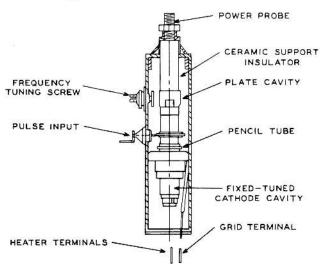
Cutaway drawing of developmental ruggedized, S-band, integral cavity unit.
